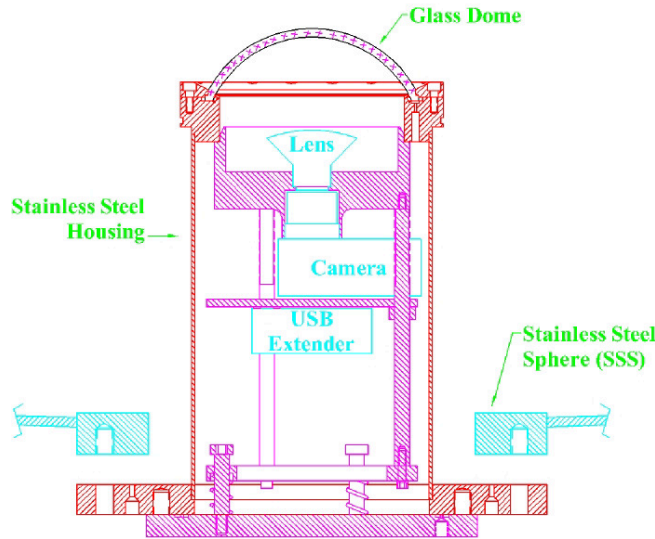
Camera assembly mounted inside the camera housing. Notice that the camera/lens mount locates the camera relative to the dome. The completed housing is mounted on the SSS through a DN250[†] flange.
